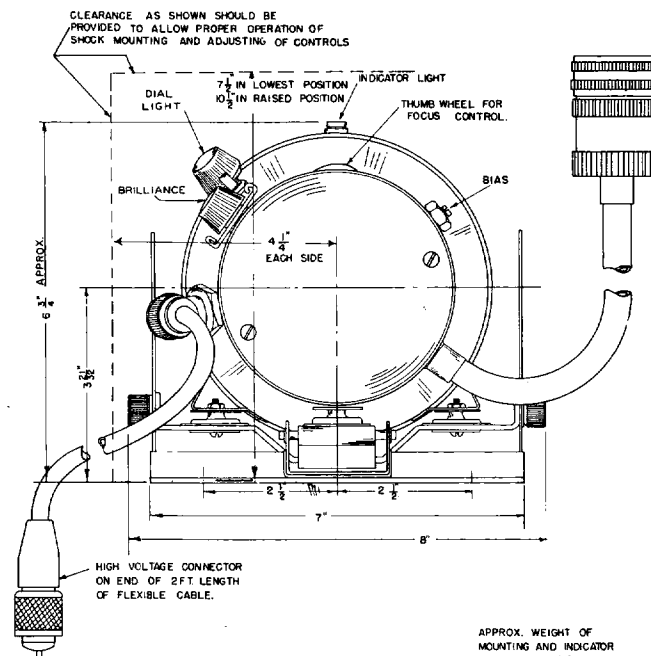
Indicator ID-99/APS-10 Installation Drawing
